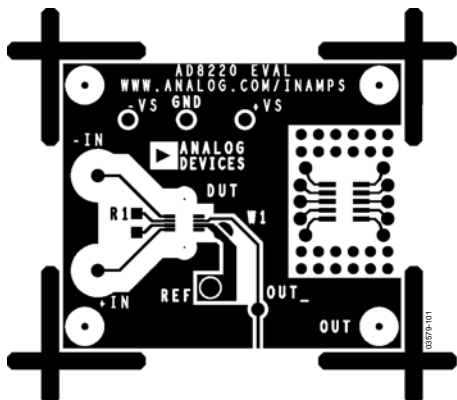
Example Layout. Top Layer of the AD8220 Evaluation Board
